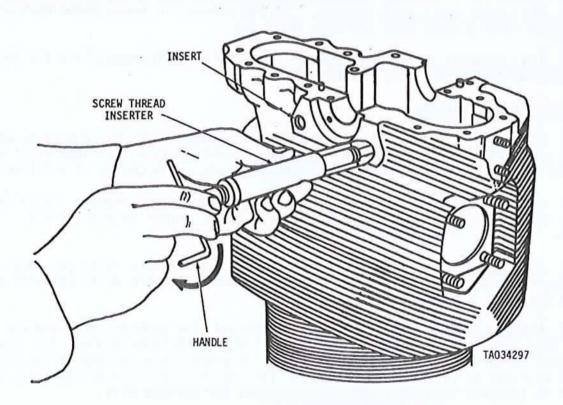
Installation of threaded insert in cylinder assembly using screw thread inserter.
